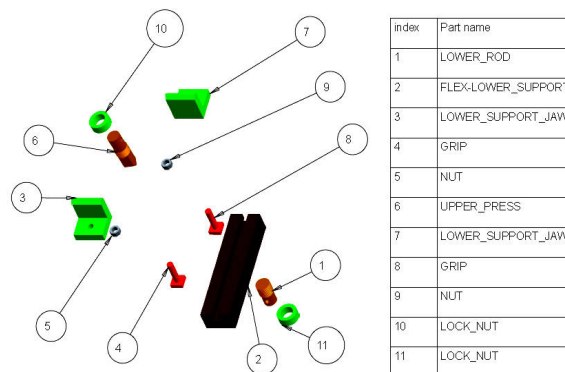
Exploded view showing various modelled components of the 3-point flexural test fixture
